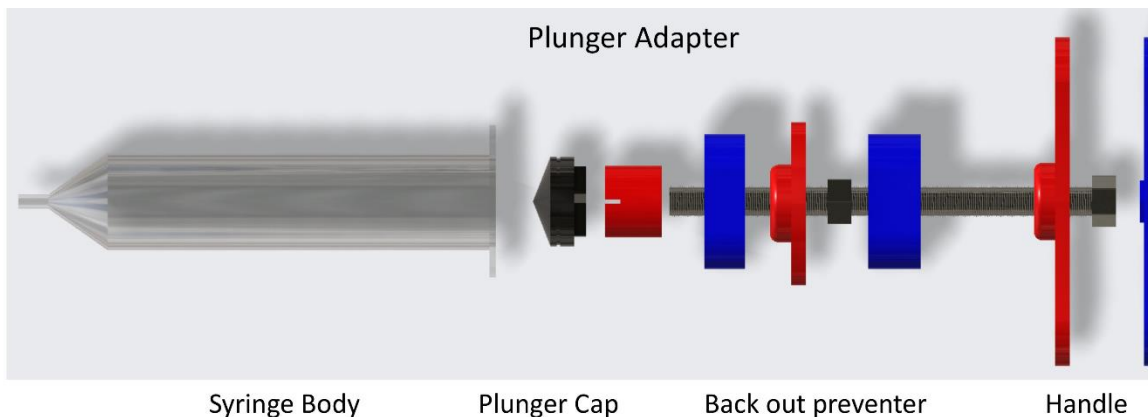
Expanded view of the modified plunger assembly with 3D printed parts for manual screw-type operation.
